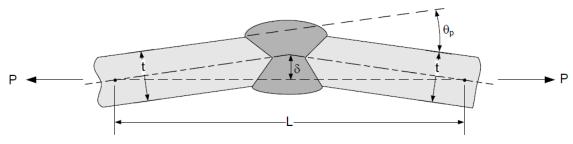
Angular Misalignment of Butt Weld Joints in Flat Plates
